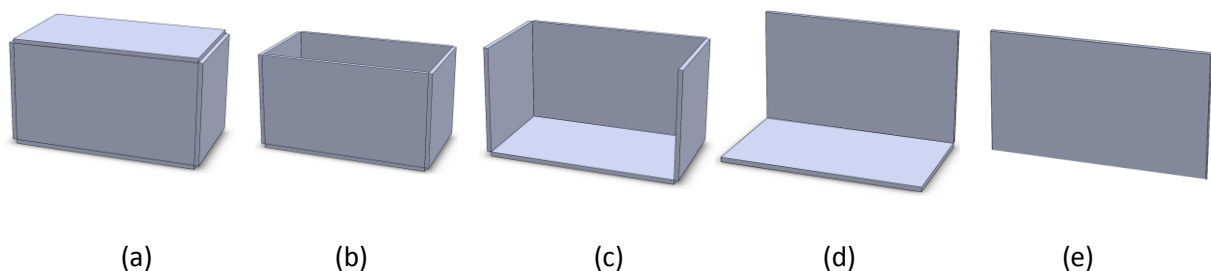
Shows a box stripped down to a wall. (a) is box, (b) is an open box, (c) is a wall with a flap and sides to support (d) is wall with a flap and (e) shows a free standing wall.
